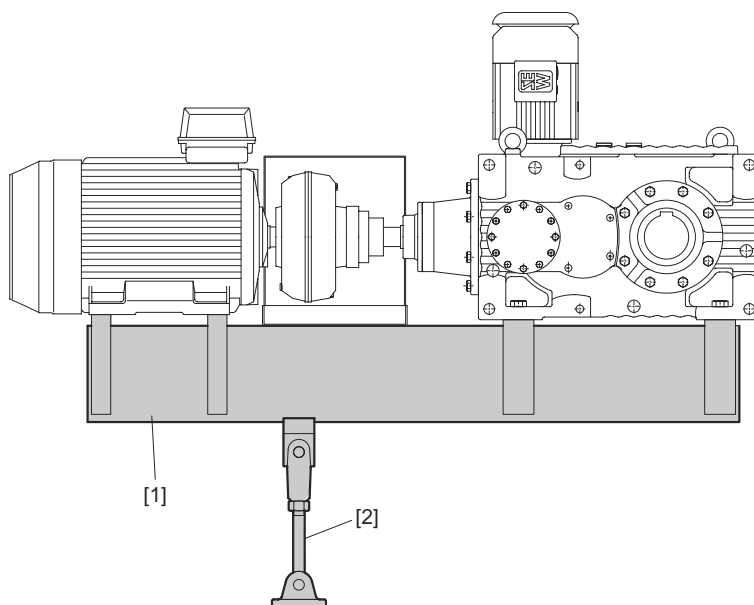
Industrial gear unit of the MC.. series on swing base with torque arm
